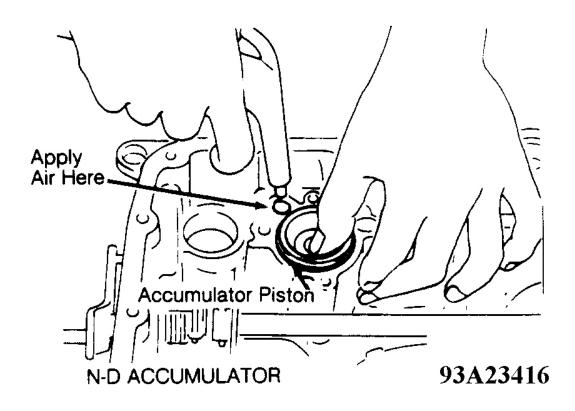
Removing N-D & 3-R Accumulator Pistons Courtesy of NISSAN MOTOR CO., U.S.A.
